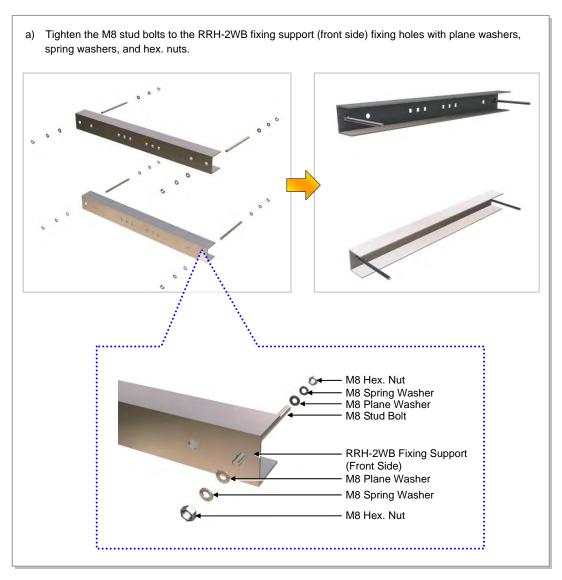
Fixing Tower Type RRH-2WB (1)
